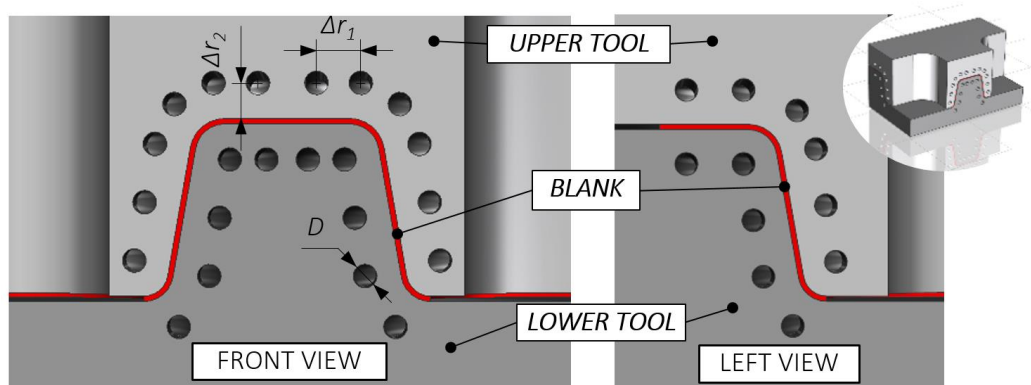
Position of the cooling channels in the stamping tools, where the main geometrical parameters are detailed.
